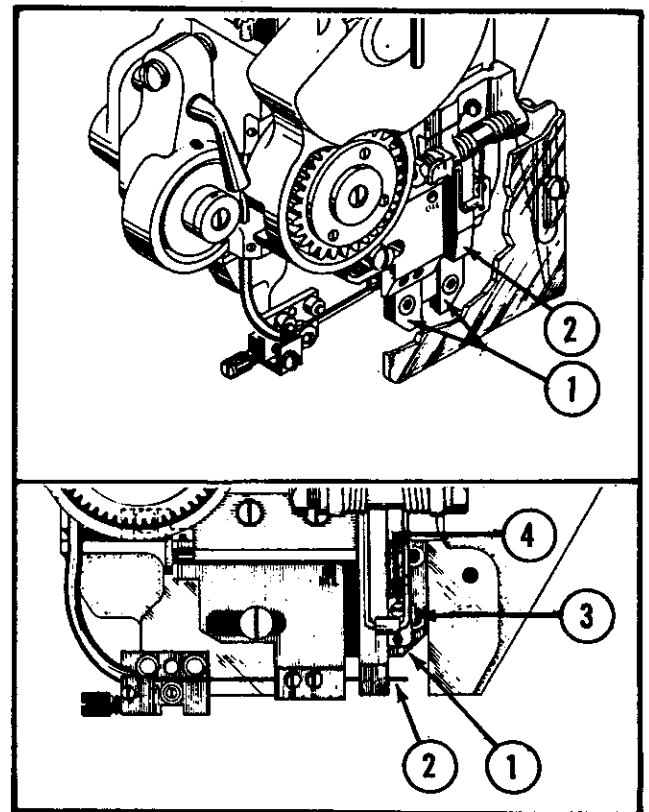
Adjustments for Aligning Gripper Bar and Formers
